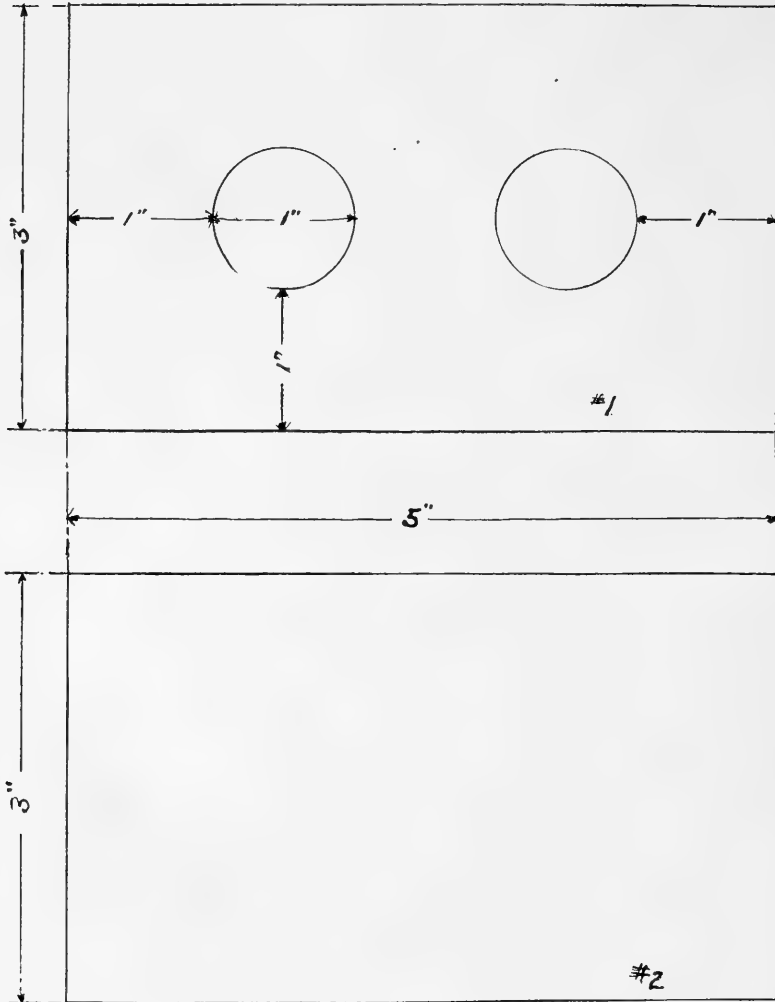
A weed seed holder. This device can be made from two layers of thick cardboard by means of a shotgun wad cutter.
